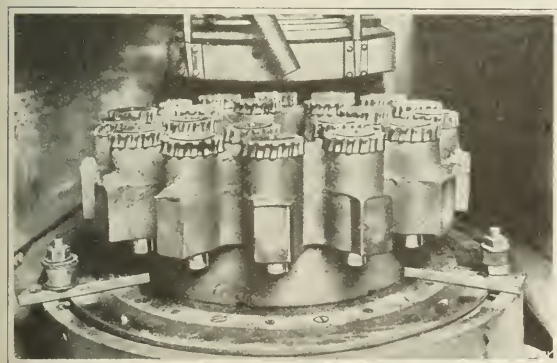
Special Fixture for holding Steering-gear Worm-wheels
